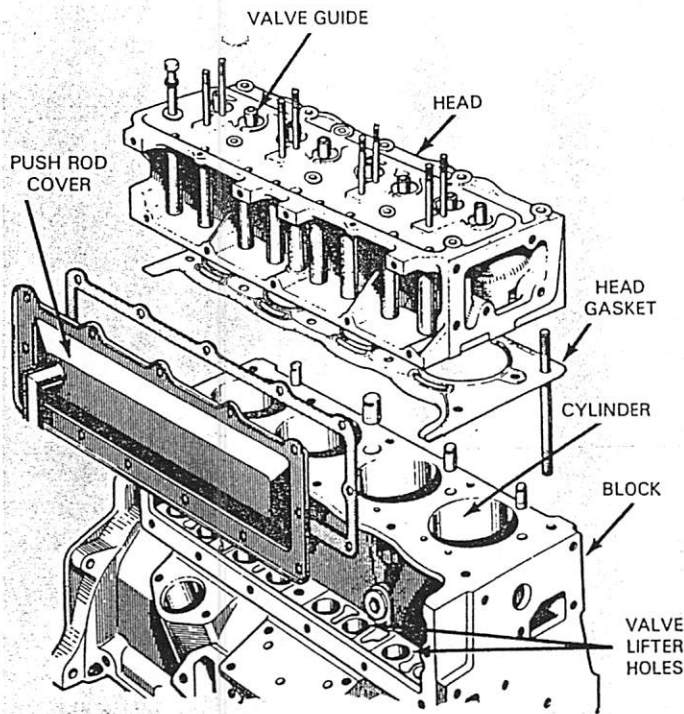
Typical cylinder head for valve-in-head engine. Head and block surfaces must be smooth and true. (British-Leyland)
